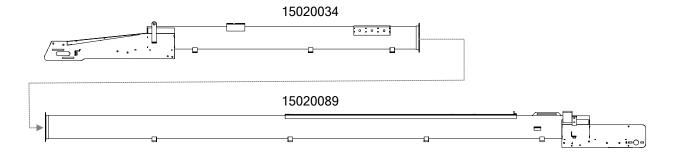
Conveyor Tube Layout for 1535 TD Model (Batco & Westfield)
